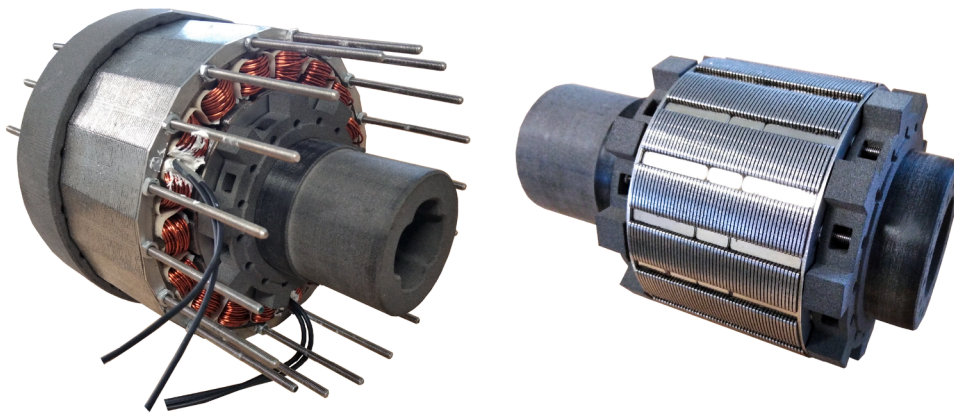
Assembled prototype machine (left); Rotor with magnets installed (right).
